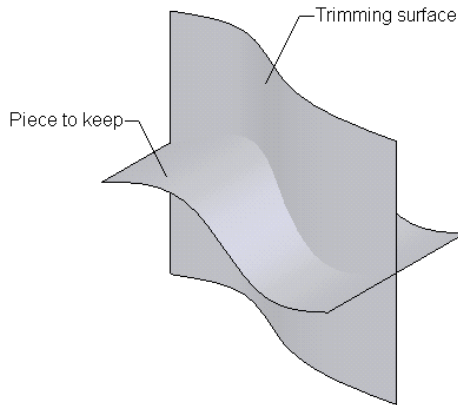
Trimming surface and the piece to keep after trimming the surface
